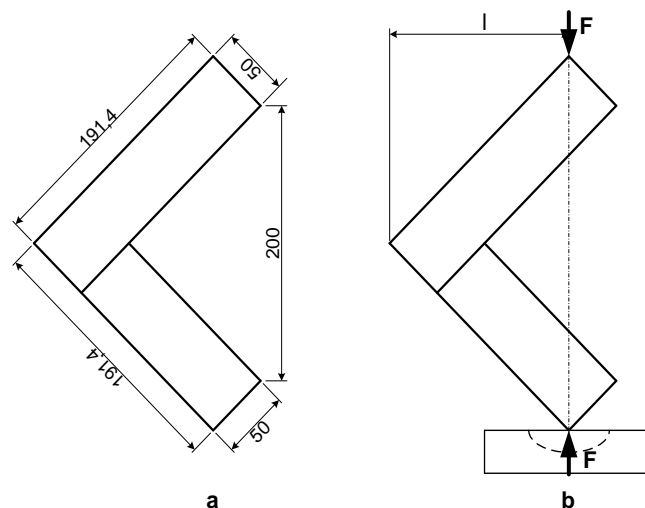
Test samples under compression bending test of the end corner joints of solid beech wood structural elements: a – Type, shape and sizes of the test samples; b – Scheme for testing the test samples under compression bending test.
